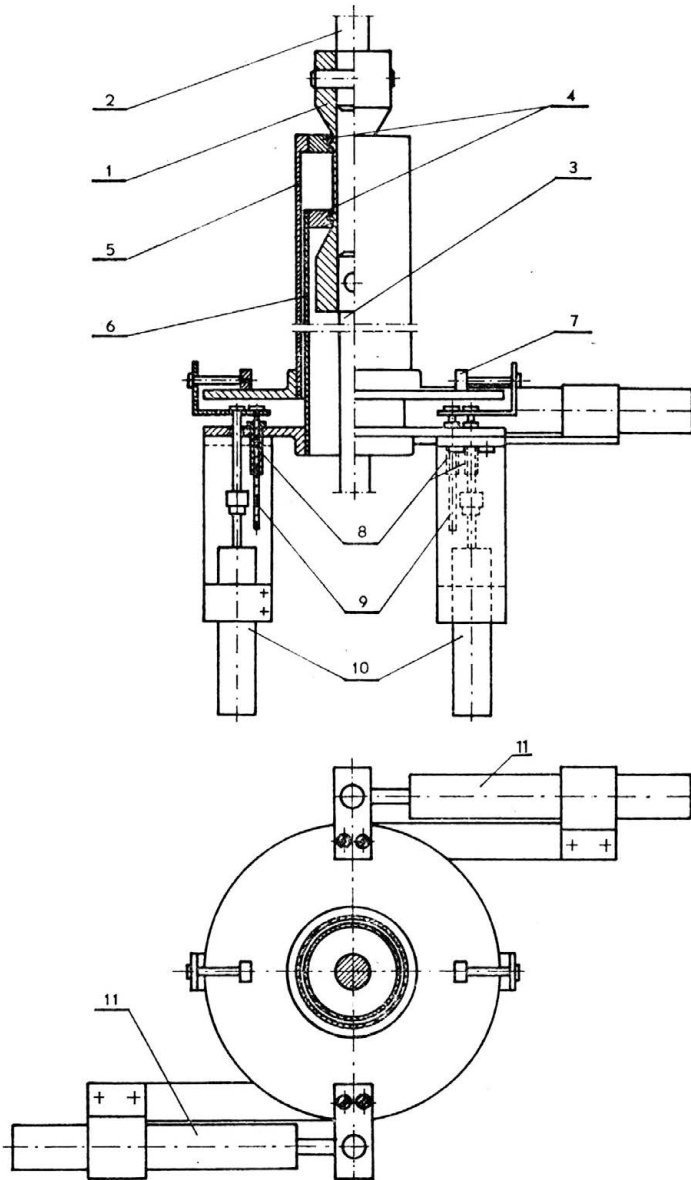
Extensometer: 1—specimen, 2—upper loading rod, 3—lower loading rod, 4—clamping ring, 5—upper leg of extensometer, 6—lower leg of extensometer, 7—bearing, 8—bush, 9—mandrel, 10, 11—transducers.
